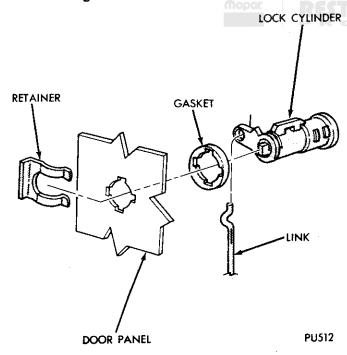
Lock Cylinder LOCK CYLINDER (Fig. 4)
